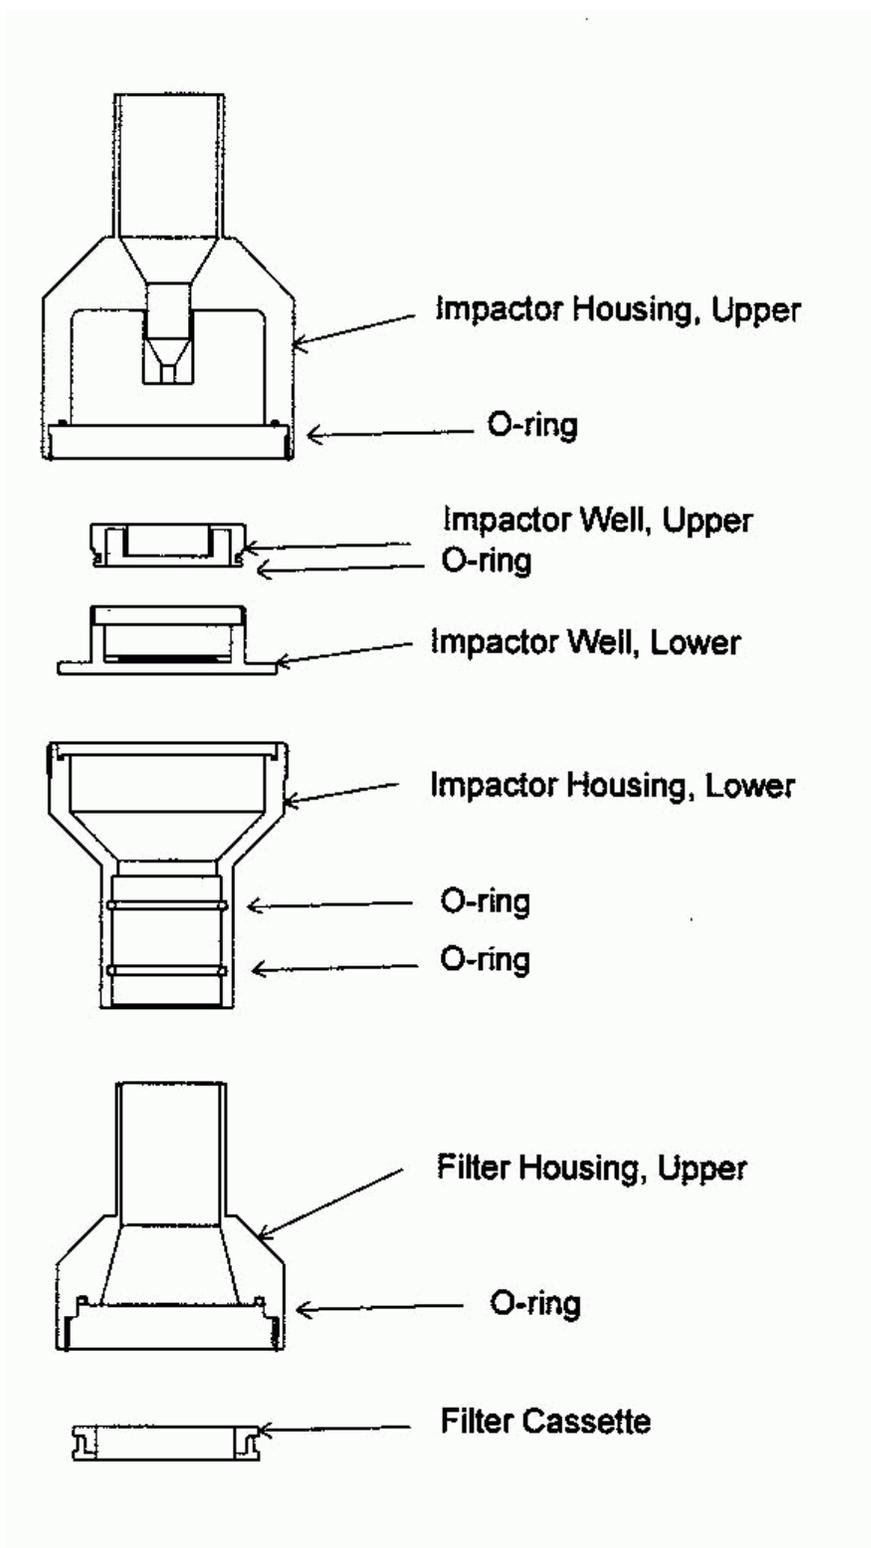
Exploded Cross-Sectional View of The PM<sub>2.5</sub> Impactor Well and Filter Holder
